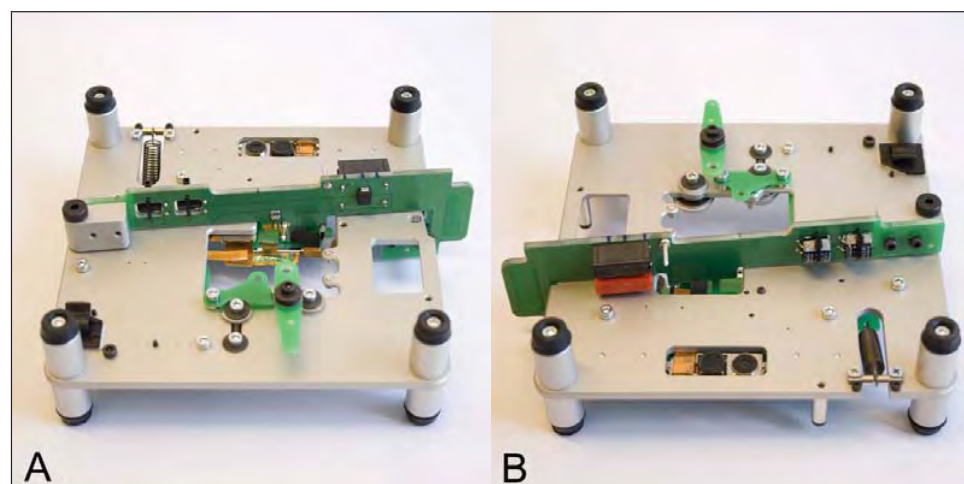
A) The bottom of the fixture. B) The bottom of the fixture rotated 180°
